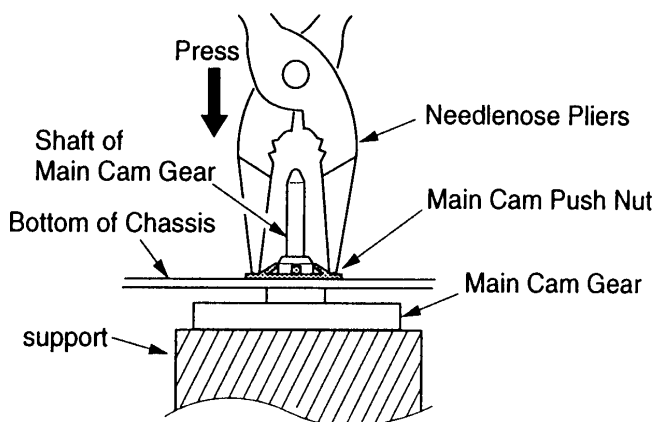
Main Cam Gear/Drive Rack Arm Removal
